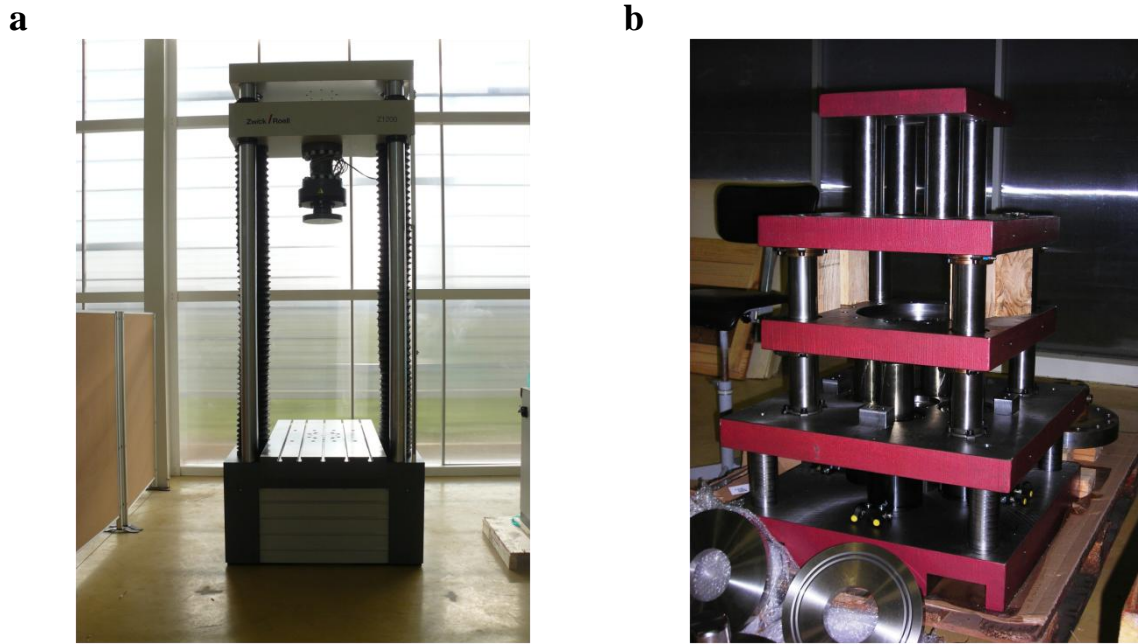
Experimental device used for deep-drawing tests: (a) Zwick-Roell 1200kN machine, (b) test setup
